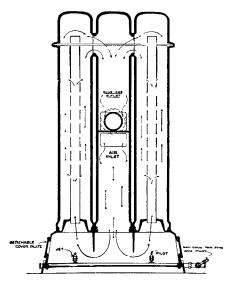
Sectional View showing the Construction of the Davis Radiator
